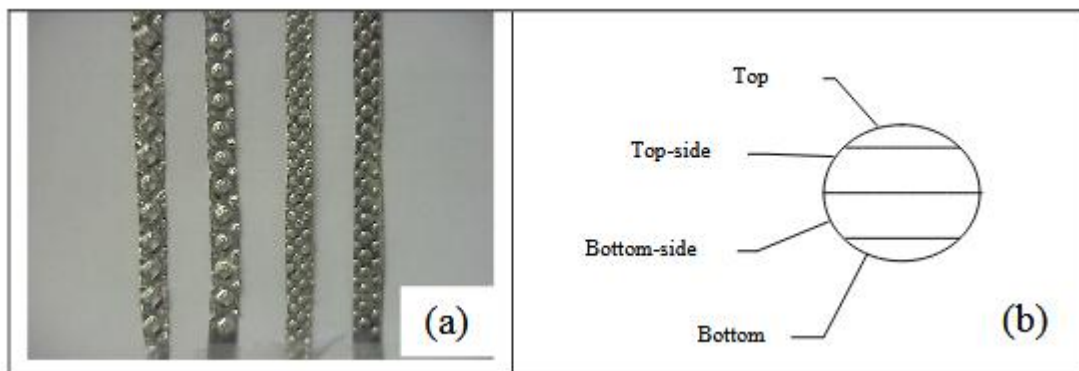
a) The strips with different type of coarseness used for fabrication of the abrasive-cutter brush (from left: very coarse, coarse, mild, fine) b) Different parts of produce's location.
